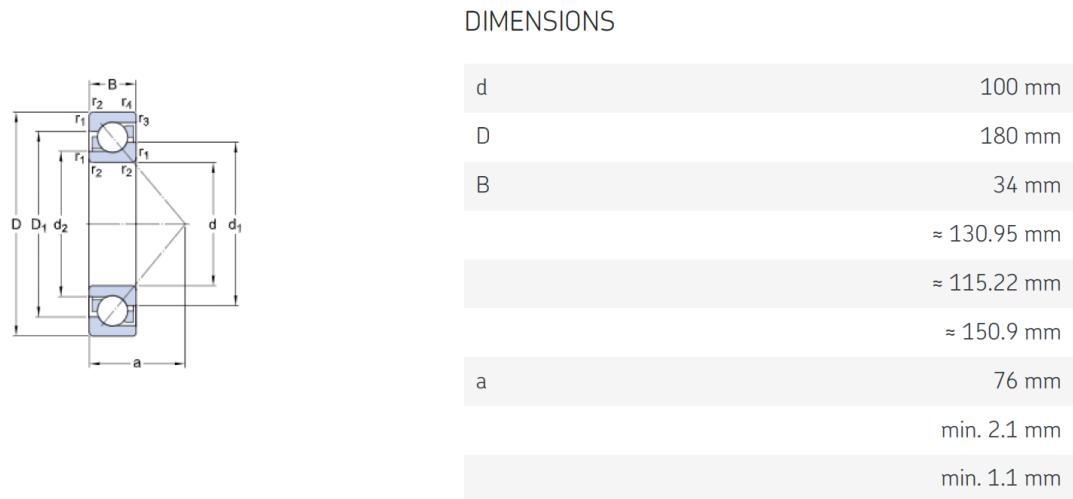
SKF 7220 BECBM - Technical Specification [15].
